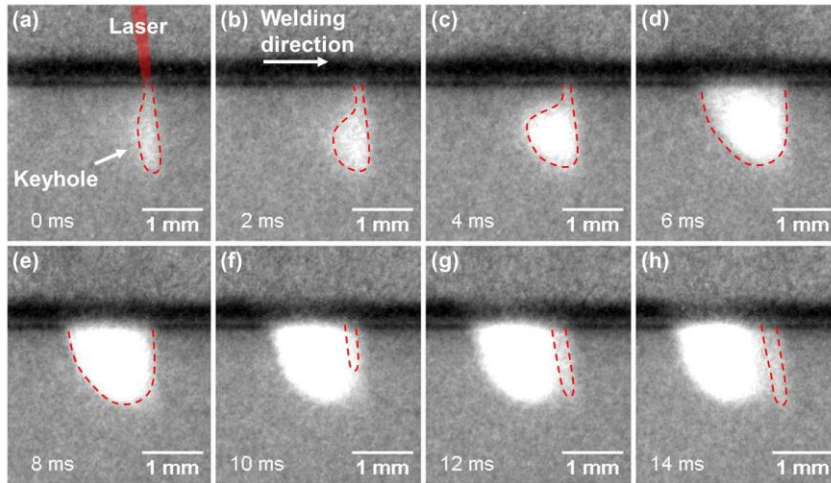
Single frames out of a high-speed X-ray video of a weld in Cu-ETP. Bubble formation at welding copper. $P = 3$ kW, $v = 4$ m/min, $d_f = 100$ μ m.
